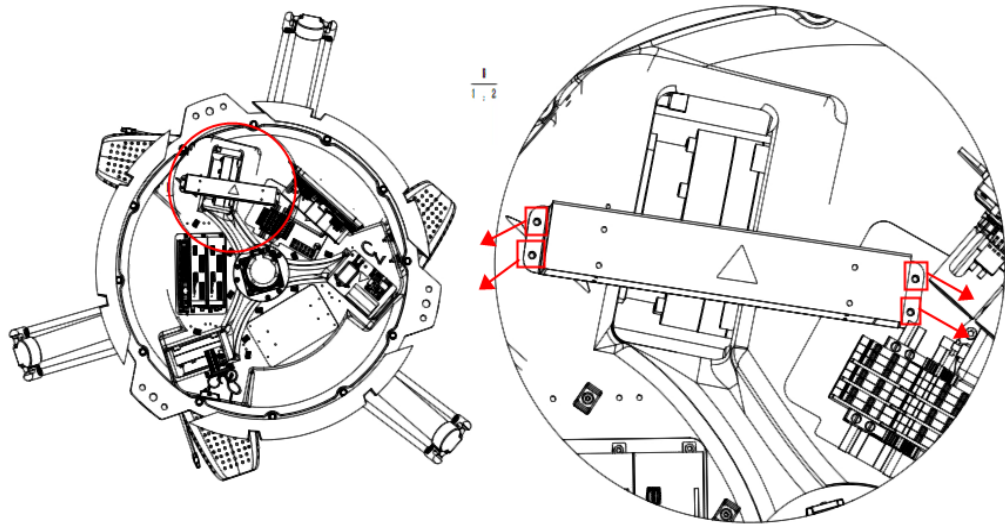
Schematic diagram of removing the 4 fixing screws on the 24V switching power supply adapter board
